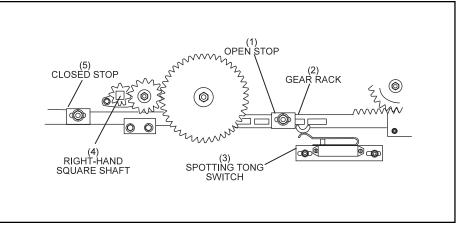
Adjustable Stops on Setting Table Tong Rack.
